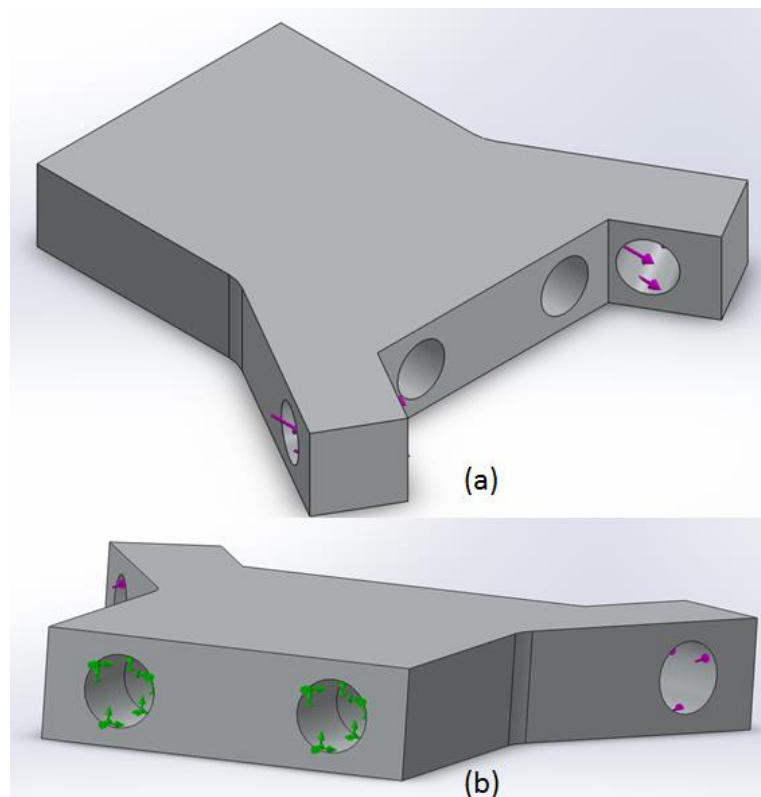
Connection Plate Loading/Fixture Conditions – Part (a) shows a front isometric view where the applied forces can be seen, while part (b) shows a back side view where it can be seen that the connection plate is restrained inside the (threaded) holes which extend the length of the plate.
